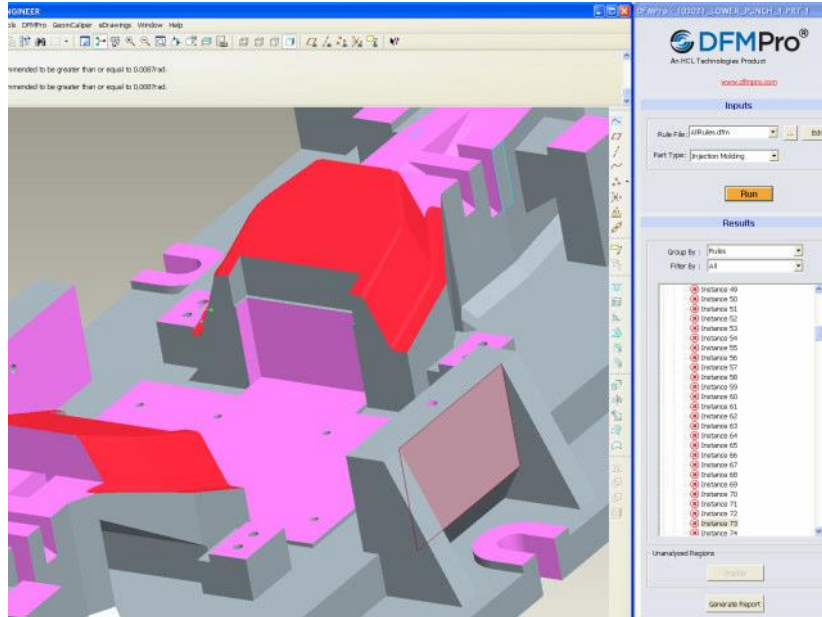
Identifying all areas in a casting which require draft using DFMPro [8].
